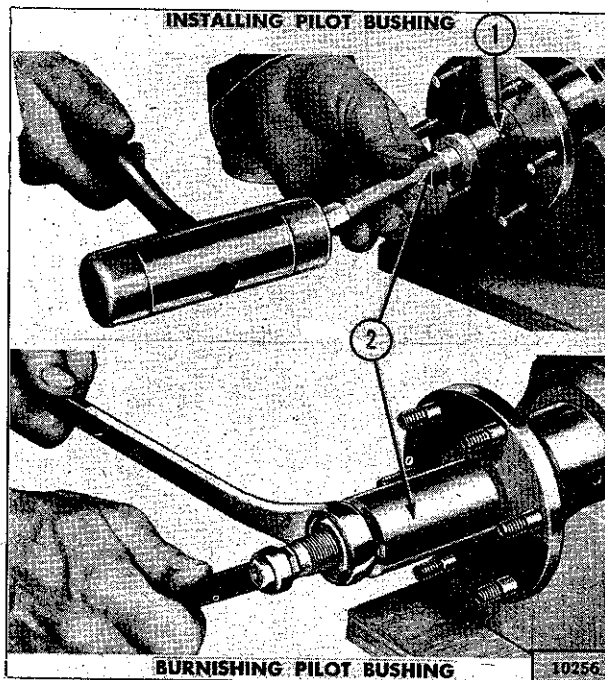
INSTALLING AND BURNISHING CRANKSHAFT PILOT BUSHING—L6-226 MODELS
